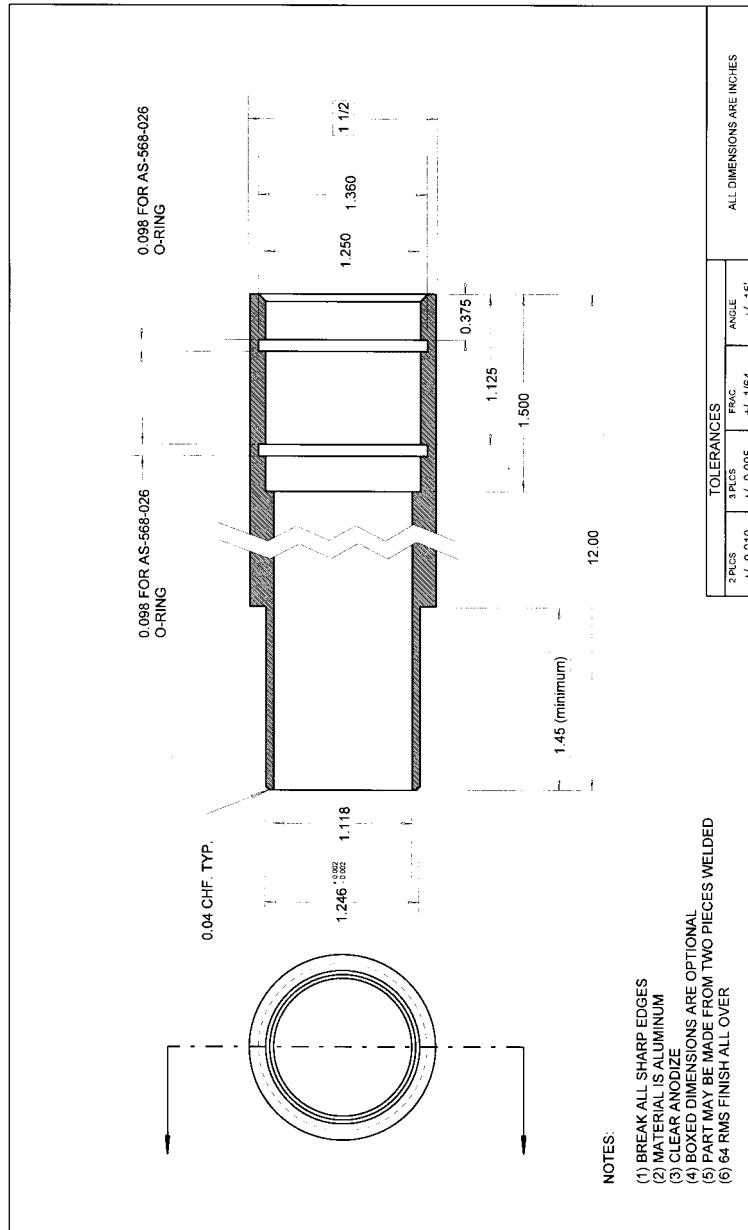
2.5-MICRON IMPACTOR ASSEMBLY
